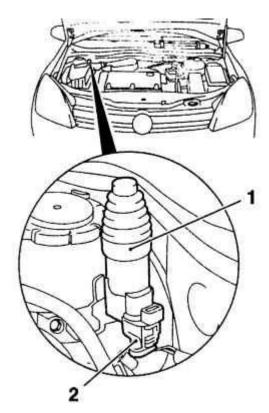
Sensor connector wiring harness, switch the hood: 1 - connector wiring, 2 - sensor-switch hood
